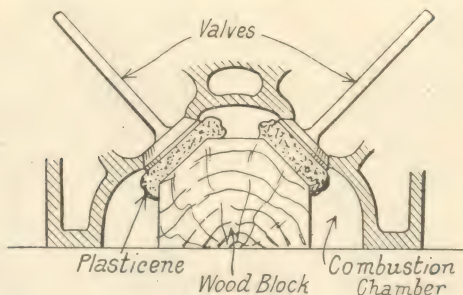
PREVENTING BENDING OF INCLINED VALVES
